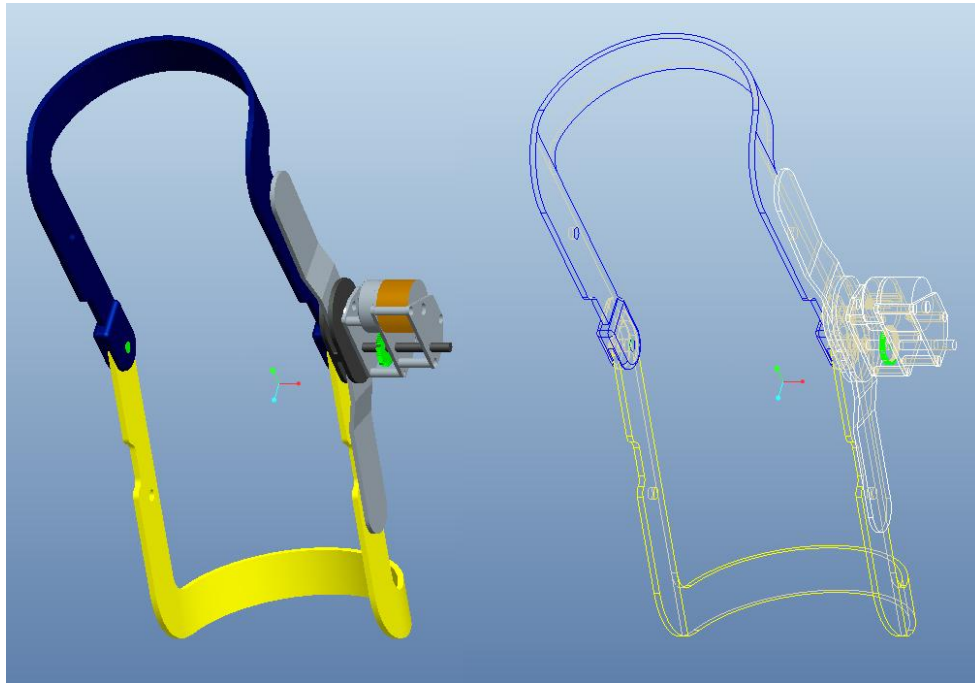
Pro/ENGINEER Secondary 3D Solid Model & Wireframe Back View
